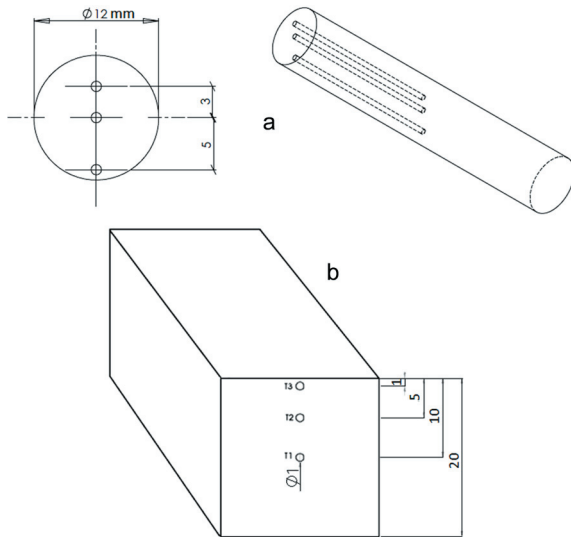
Drawings of the test probes and thermocouple positions; a) $\varnothing 12$ mm round test probe; b) square test probe
